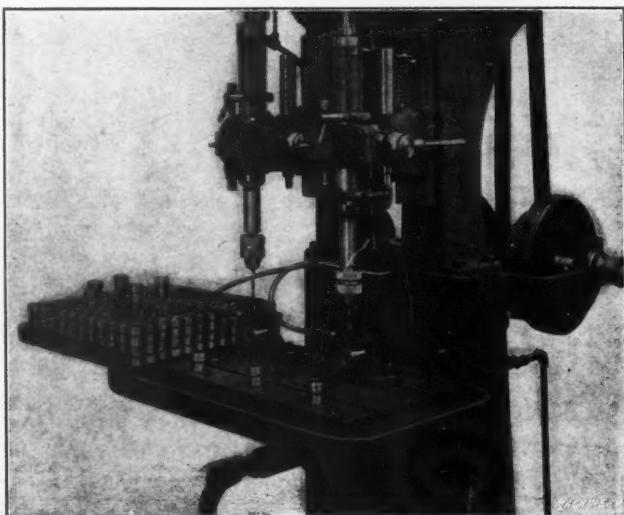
No. 2 1/4 "Avey" Ball Bearing Sensitive Drilling Machine set up for Use in drilling Steel Bushings. On this Operation the Production is 10,000 Bushings in a Ten-hour Day
